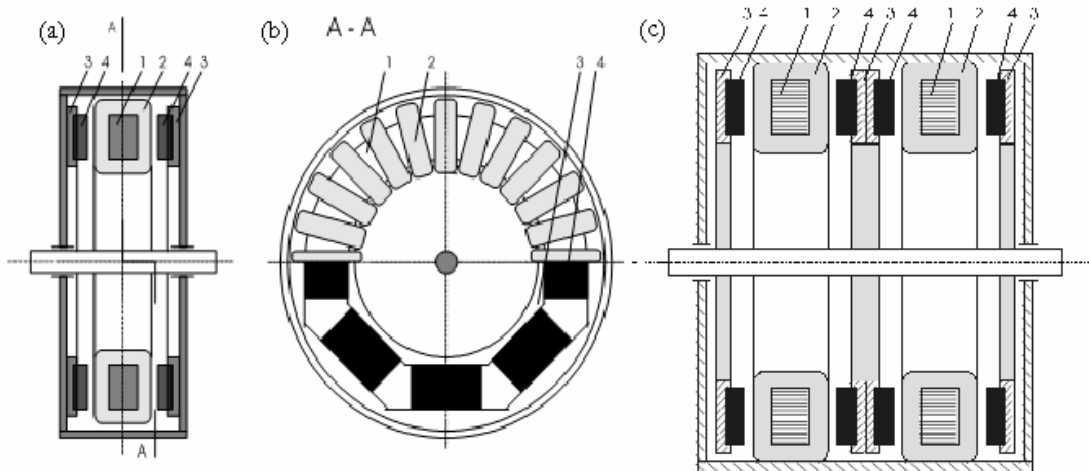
(a) Double-sided AFPM brushless machine with internal disc rotor: 1-rotor, 2-PM, 3- stator core, 4- stator winding (b) rotor and stator configuration [4]
